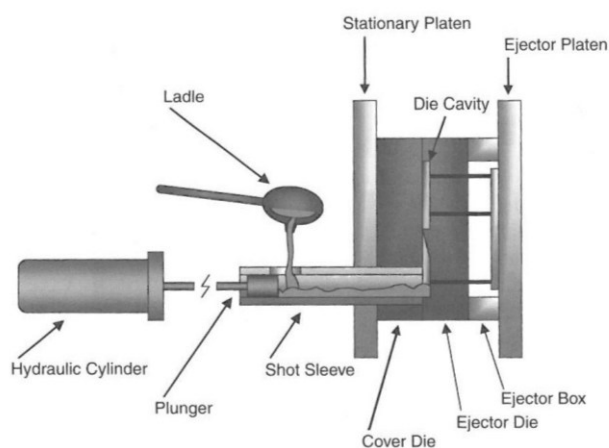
Graphical illustration of a cold-chamber die casting machine.
